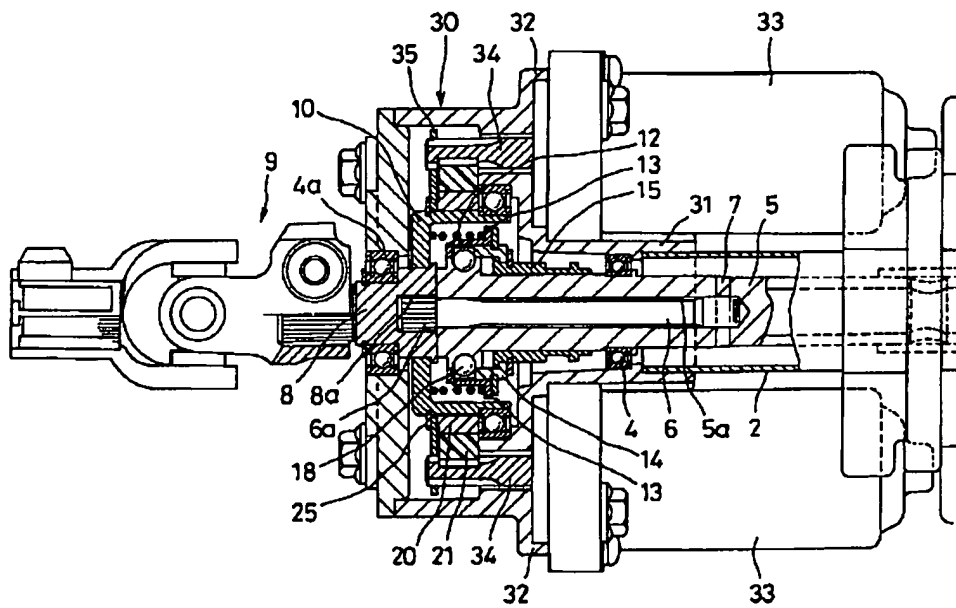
this embodiment of the invention -- the section top view showing an example
